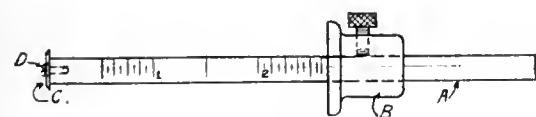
ADJUSTABLE SCRATCH GAUGE FOR MARKING OFF.
